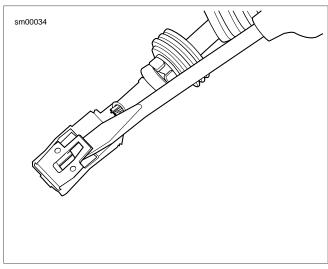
Delphi 800 Metri-Pack Sealed Main Fuse Housing: Bend Tang
